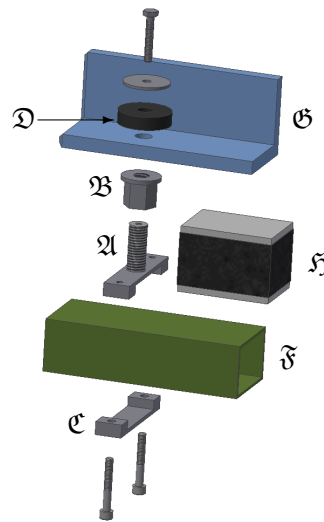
Assembly to Lift the Main Chamber — The main chamber (not shown) can be lifted on a screw welded to a half shell (A) for bake-out with the large nut (B). A counter shell (C) secures this part, while a screw into this part from top prevents unwanted lateral movement of the chamber. A piece of rubber^a (D, black disc) provides vibrational isolation from the brackets (A, C) clamping on the frame (F, green). During measurements the nut (B) is not touching the truss (G, blue) of the main chamber. Instead, it is resting on metal rubber rails^b (H, black block). Four sets of this assembly are needed for the setup.
